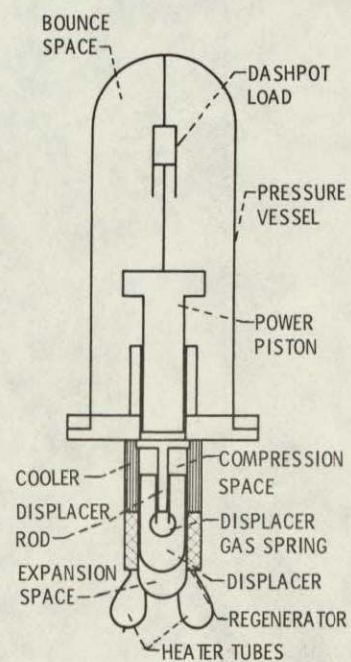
Component layout of RE-1000 free-piston Stirling engine.
